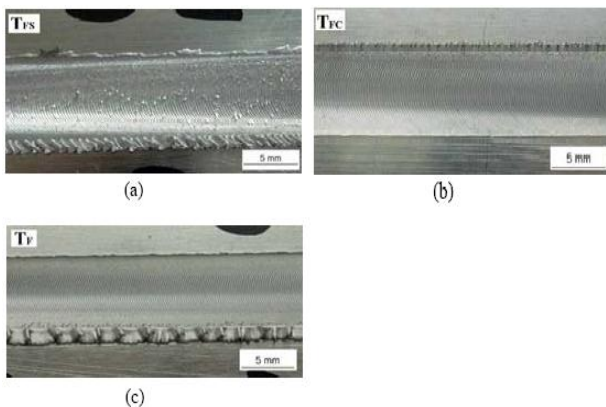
Top weld surface obtained by with studied tools: fillet (a) + scroll tool; fillet + cavity tool (b); fillet tool (c) (De-Giorggi et al., 2009).
